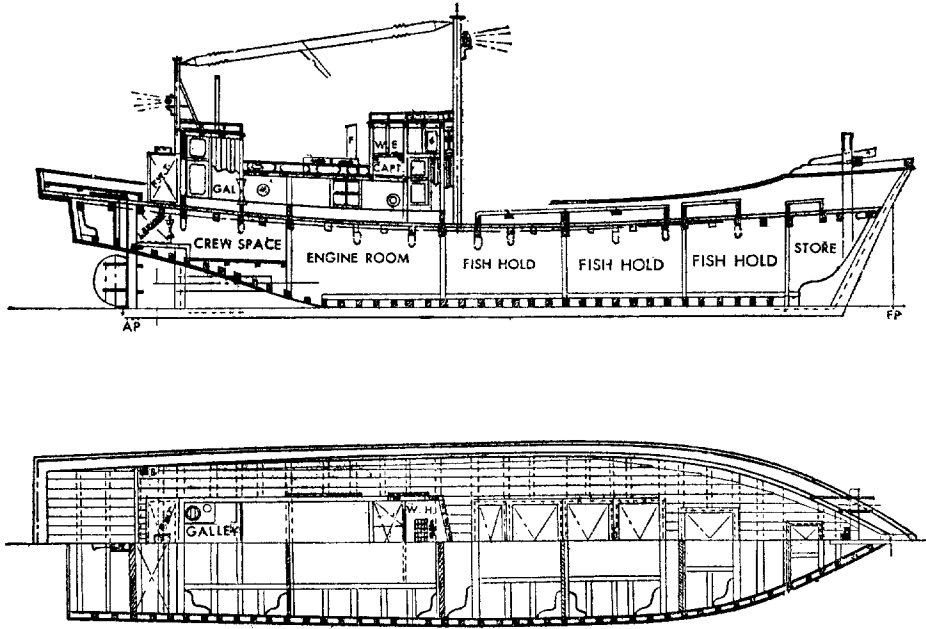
Principal Dimensions of Korean Inshore Fishing Boats.
